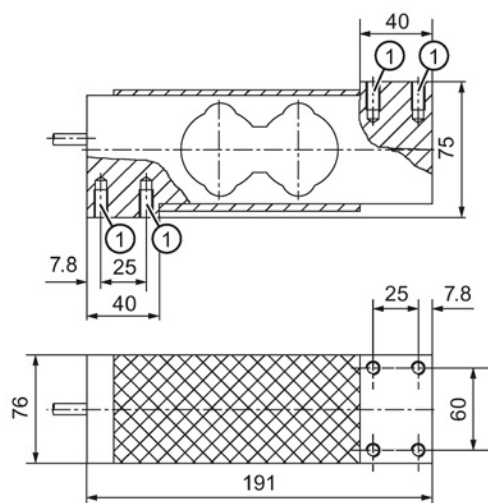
SIWAREX WL260 SP-S AB dimension drawing
